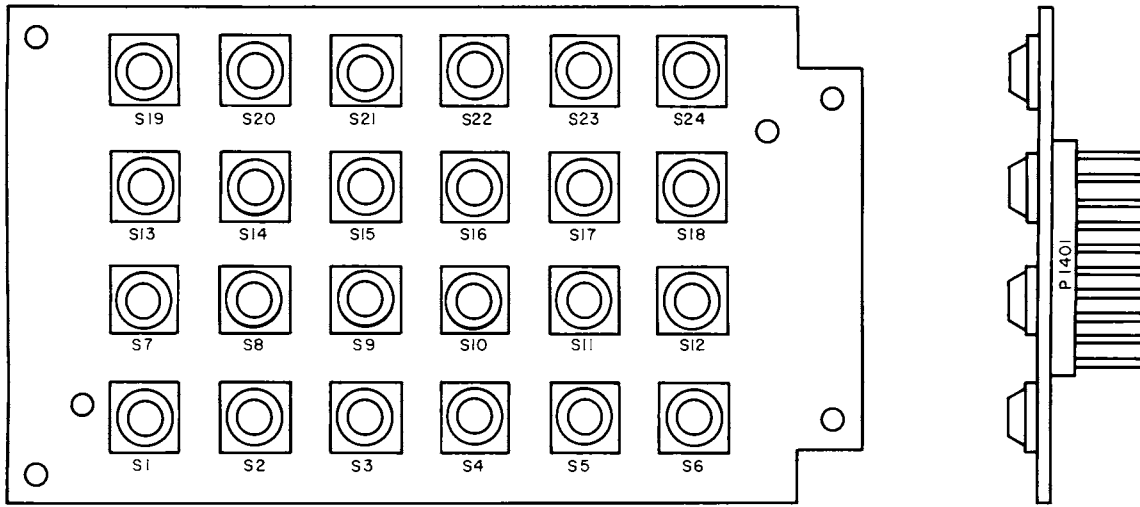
KEYBOARD PC BOARD ASSEMBLY
